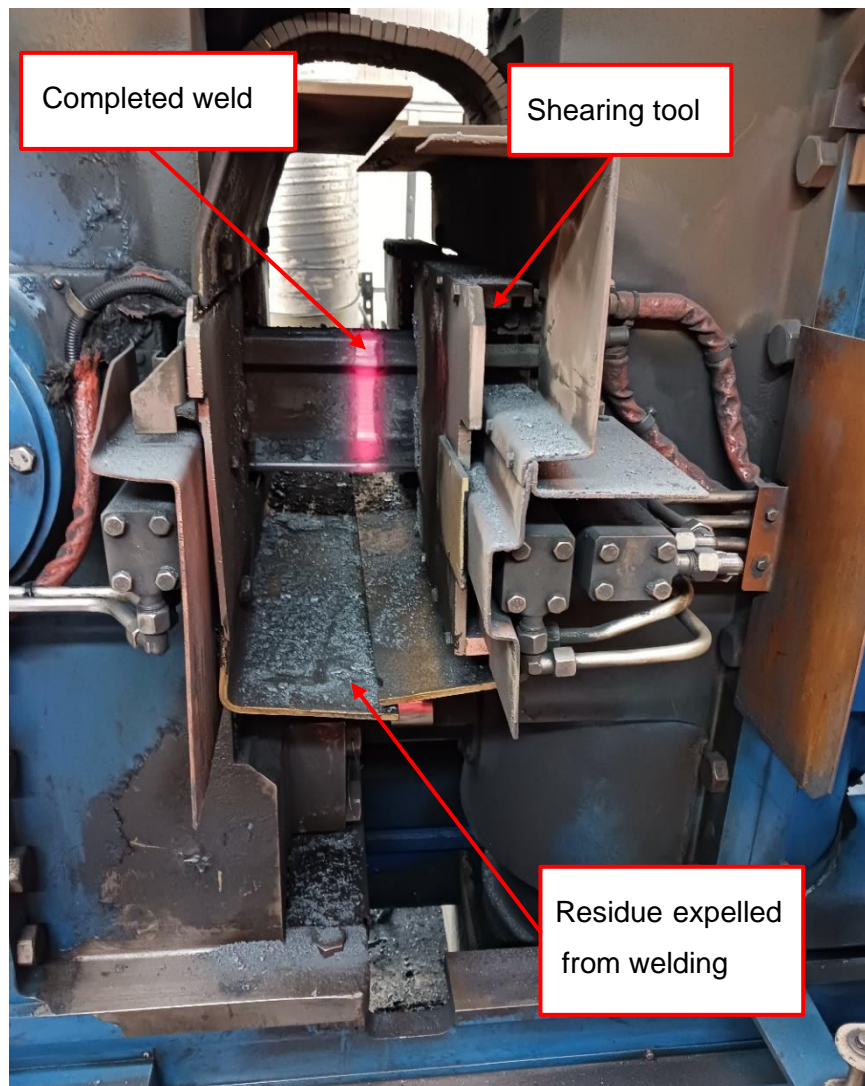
Flash butt welder with a completed weld in situ
